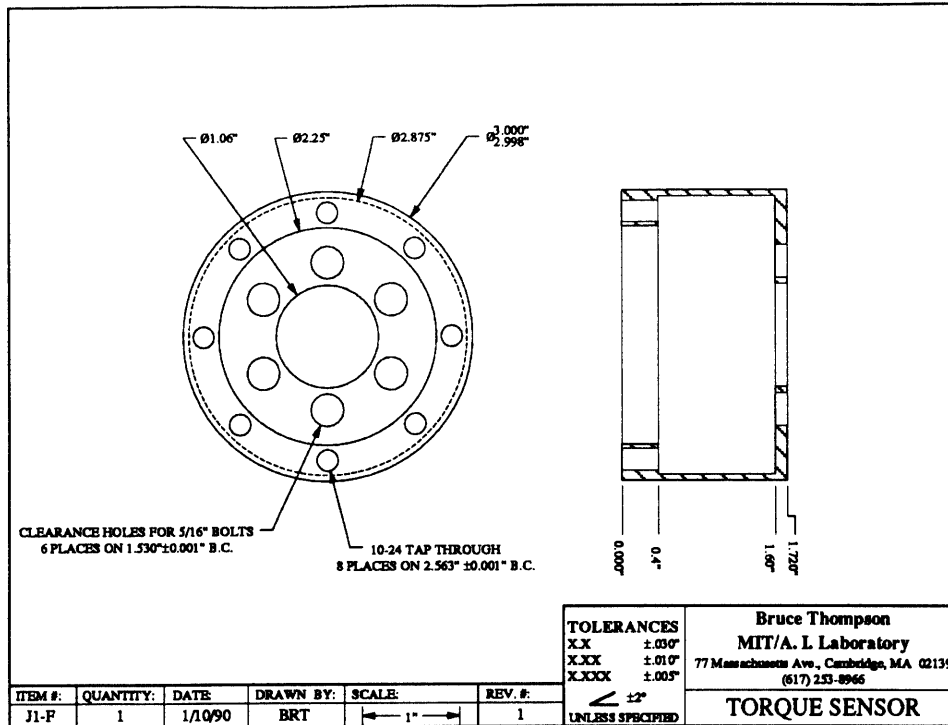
Shoulder Torque Sensor Engineering Drawing
